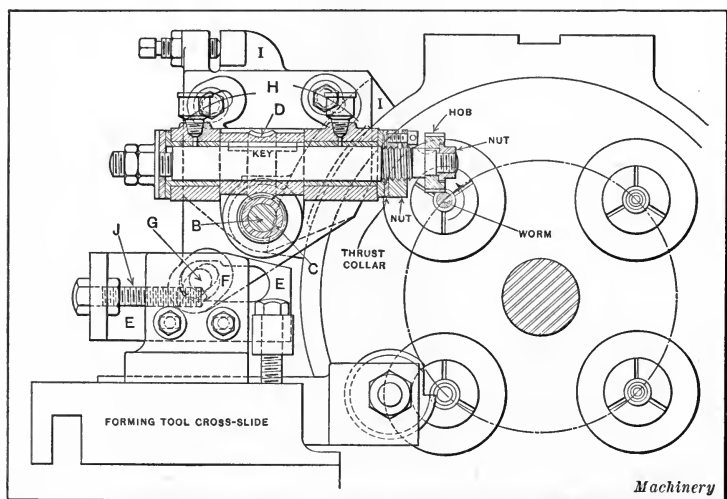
Arrangement of Worm Hobbing Attachment on Automatic Screw Machine
